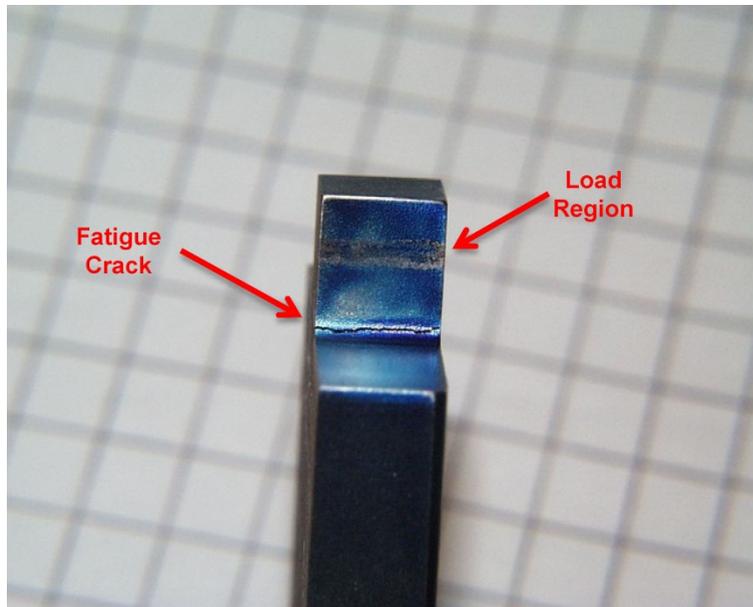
Test specimen post-test indicating bending fatigue failure.
